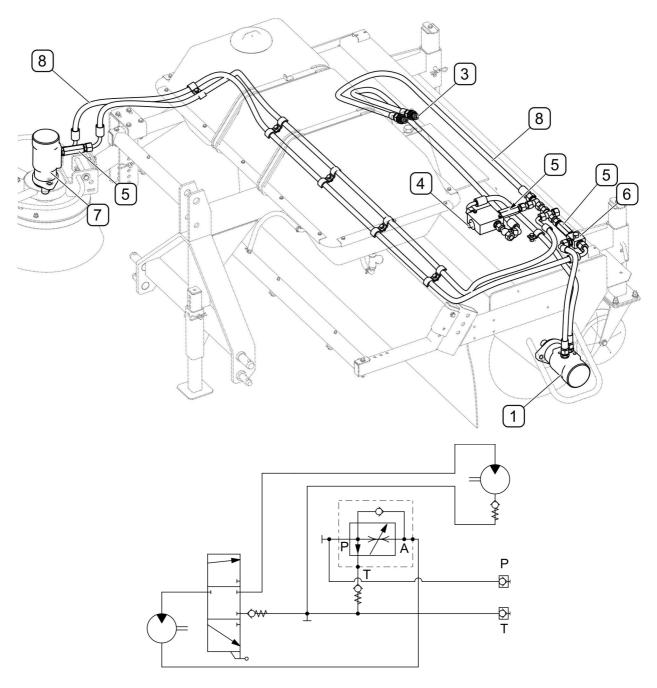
A Design of hydraulic system of ZM-1600-05 sweeper
